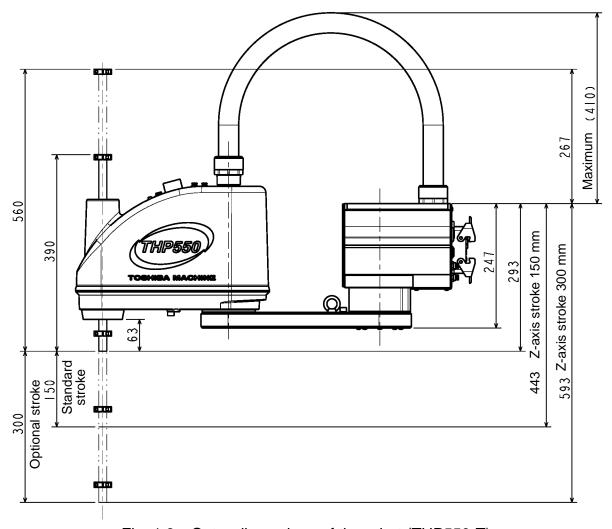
Outer dimensions of the robot (THP550-T)
